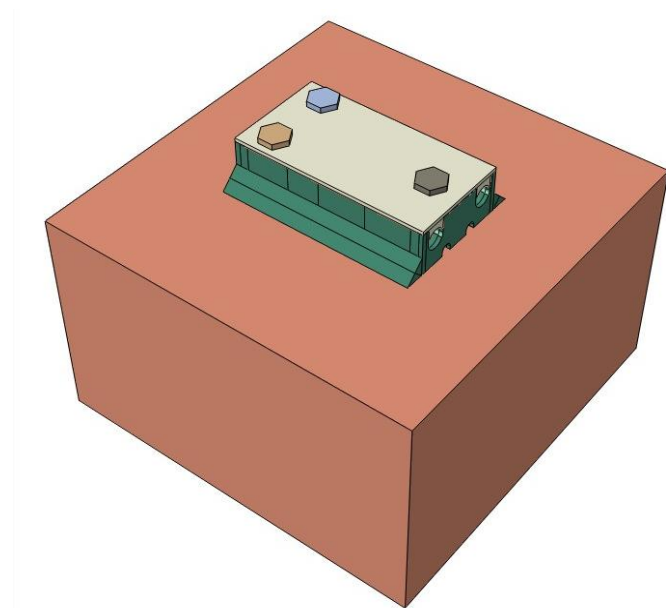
CAD model of the original junction box welded onto the vacuum vessel^[21].
